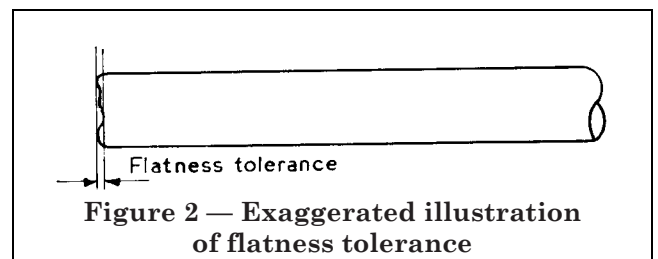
Exaggerated illustration of flatness tolerance
